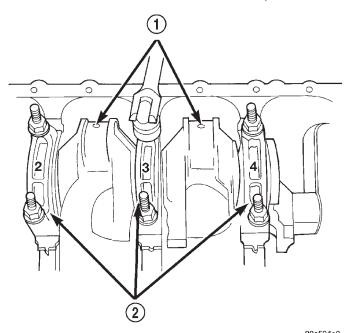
Removing Main Bearing Caps and Lower Inserts
